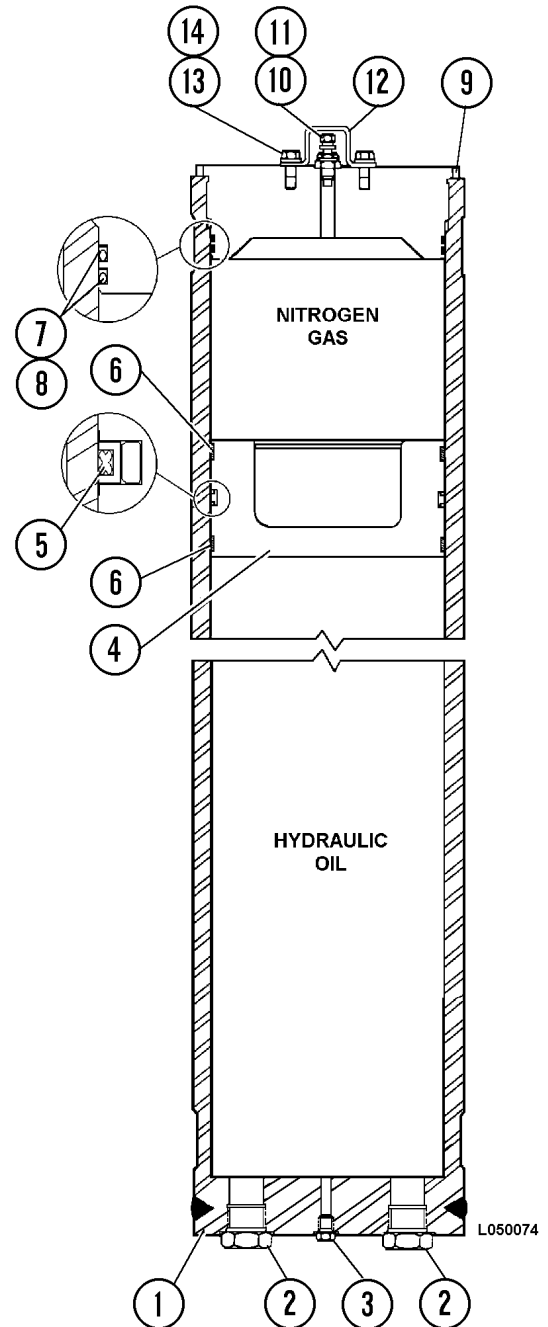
ACCUMULATOR ASSEMBLY
